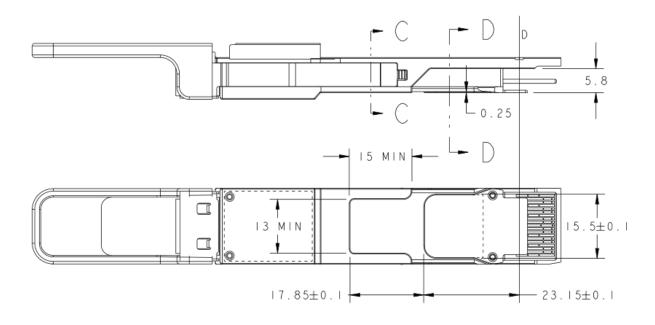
QSFP-DD1600 Improved thermal design top/bottom module views
